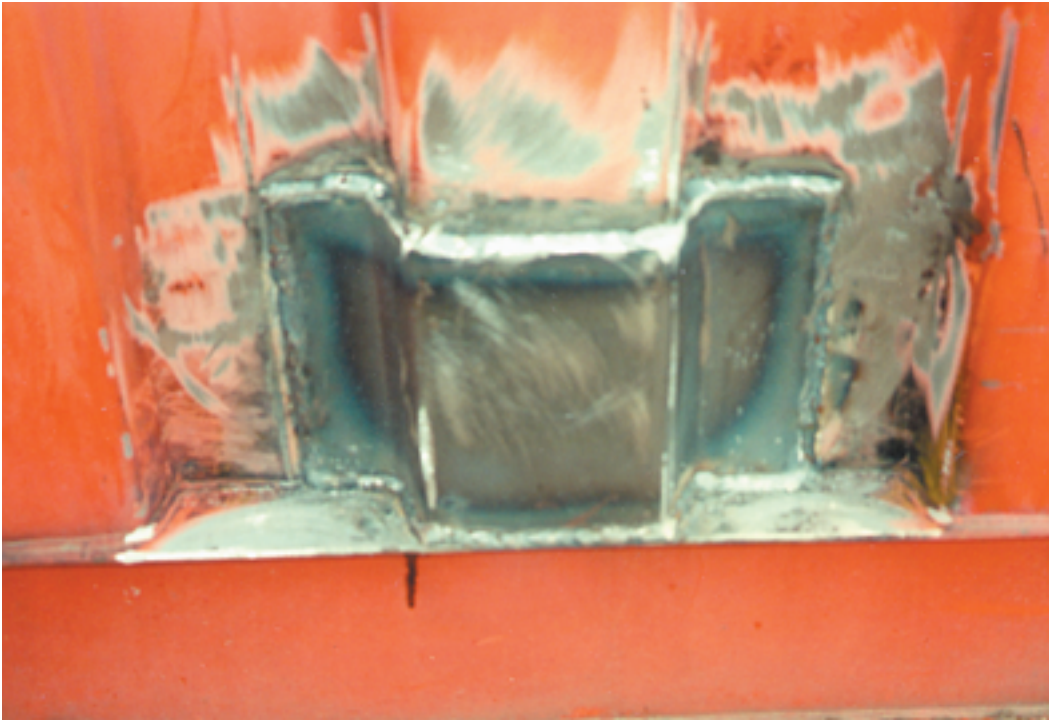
/ Preparation of a panel patch by grinding and wire-brushing (note clean, bright weld condition)
